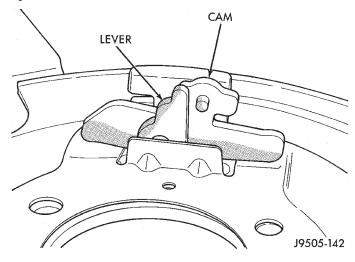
Cam And Lever SPLASH SHIELD/CALIPER BRACKET/LEVER BOOT
